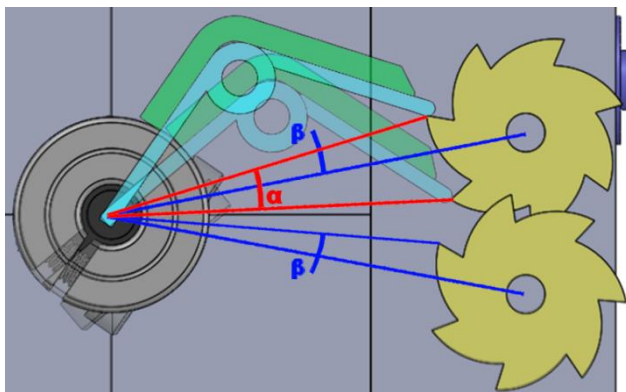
A top view of the angle of rotation provided by the motor to move one tooth of the input gear. This 14.93 degree rotation in the motor shaft (denoted by angle α) produces approximately 1.29 degrees of rotation in the output shaft. The angle β is the dephase angle of the two input gears.
